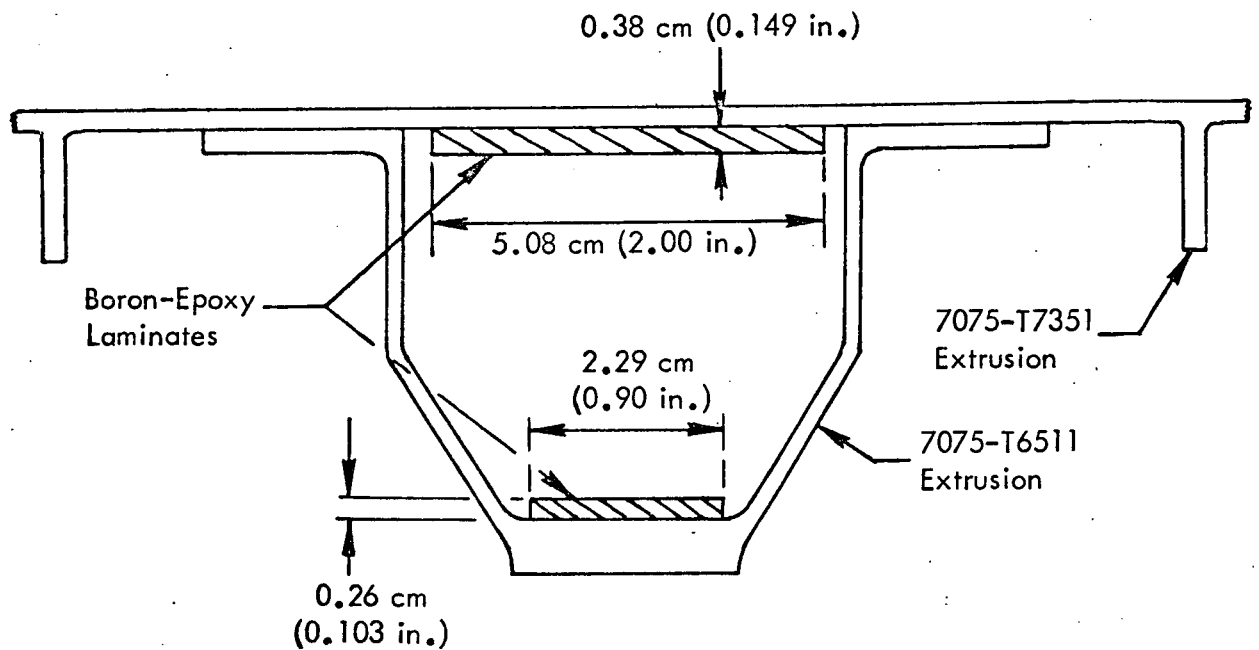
TYPICAL UPPER SURFACE STRINGER ELEMENT
